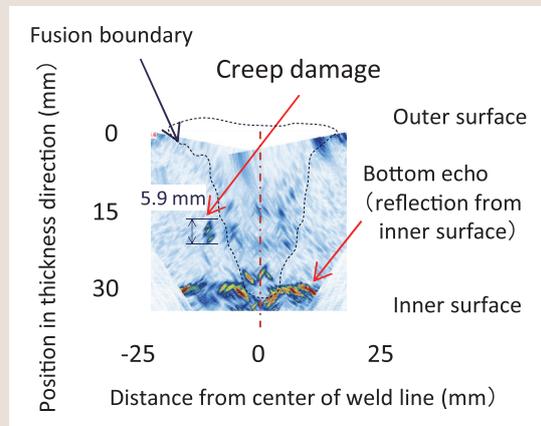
Results of ultrasonic testing for 9Cr steel girth welded joint
